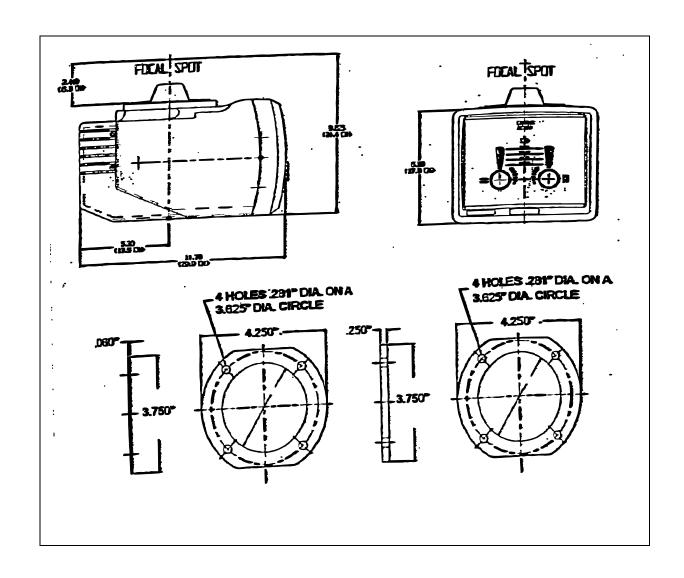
COLLIMATOR MOUNTING DIMENSIONS
